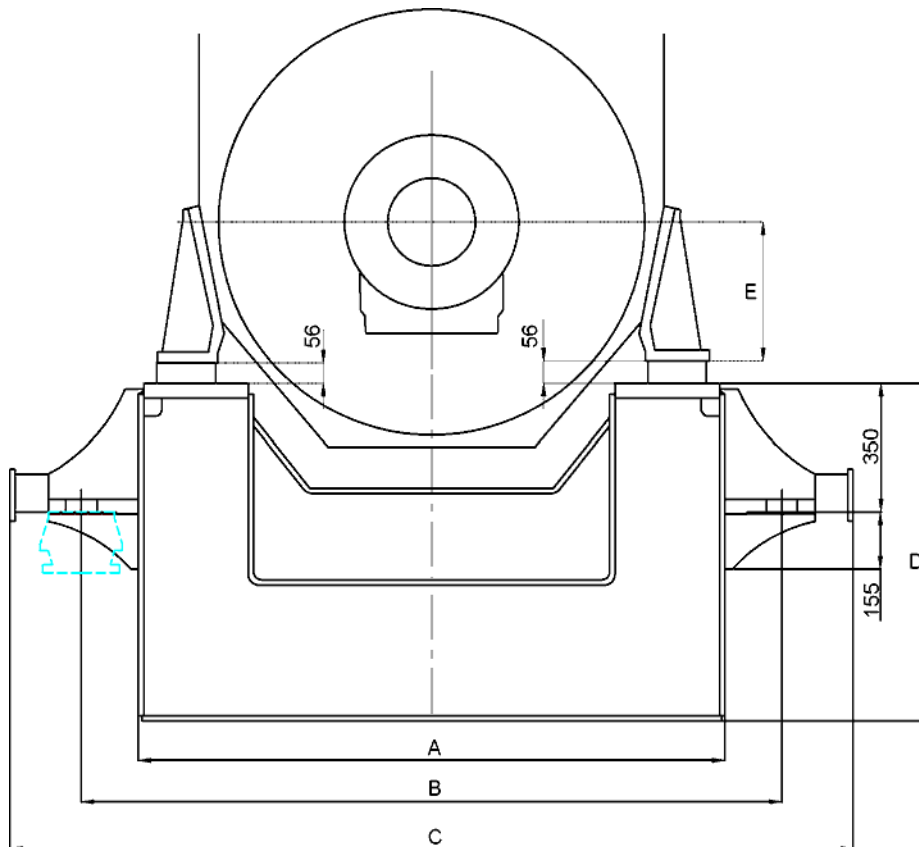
Standard generator dimensions and common base frame arrangement (9506ZT732)
